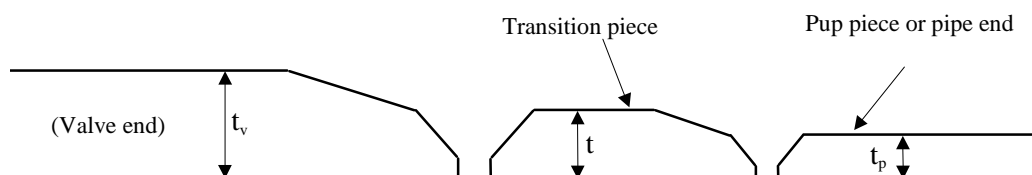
b - Typical assembly detail (Valve termination shall have a minimum thickness in accordance with [ASME B16.34](#))
